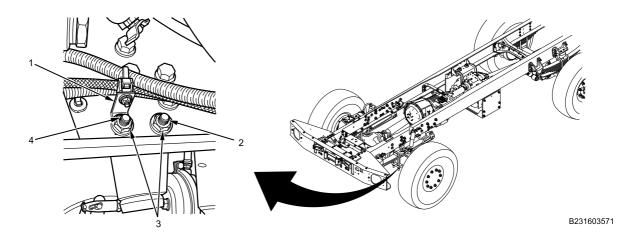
Front Axle Bumper Stop Bracket Locknut and Harness Clip Extension Removal.
